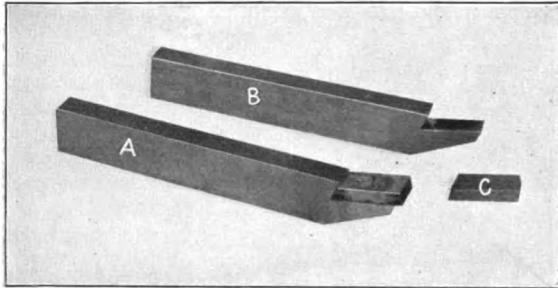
A SPOT-WELDED TOOL AND ONE READY TO WELD
